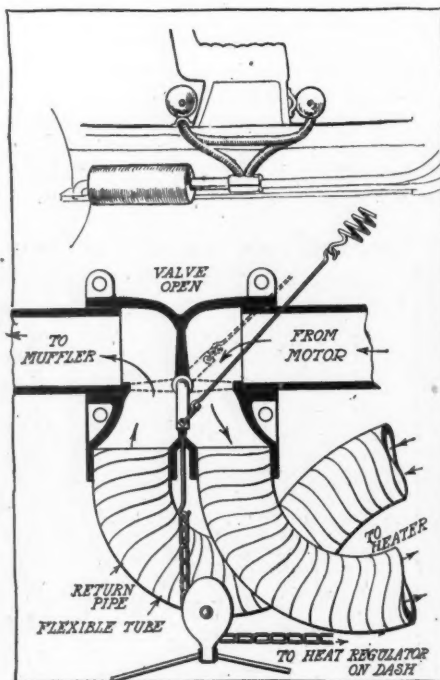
GENERAL PLAN AND DETAIL OF VALVE
